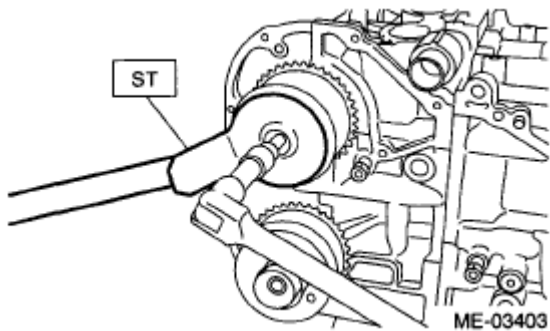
Identifying Cam Sprocket Wrench (Intake Side)
